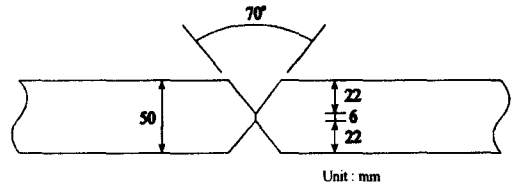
Joint design for thick steel plate submerged arc welding
